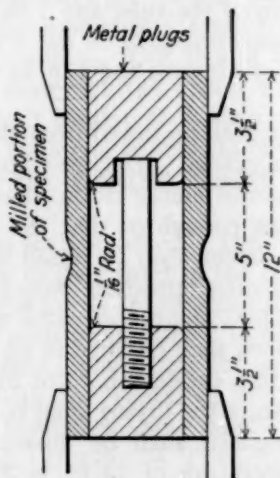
Metal Plugs Used for Tension Test, Showing Location of Plugs in Test Specimen.
